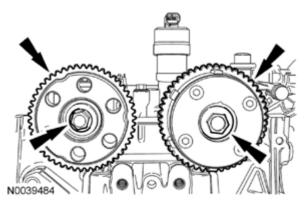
Locating Camshaft Sprockets And Bolts Courtesy of FORD MOTOR CO.
